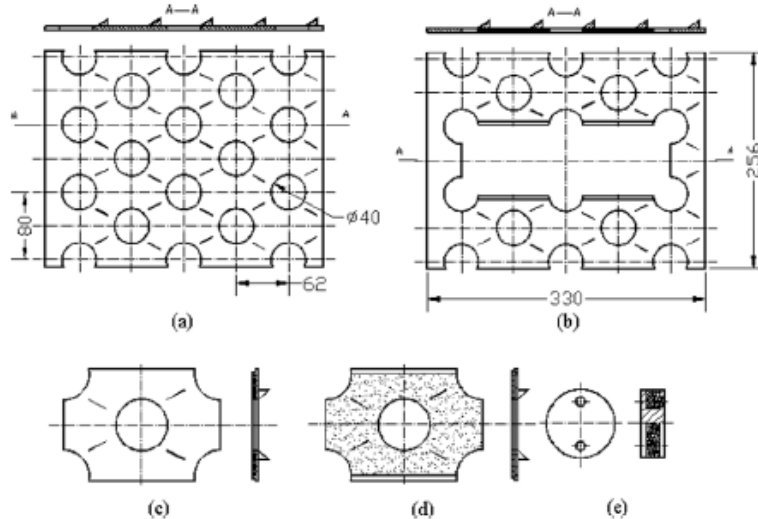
Test core of staggered tube bank fin, (a) plate forming flow passages, (b) Support plate, (c) fin surface II, (d) fin surface I, (e) tube with cast naphthalene.
